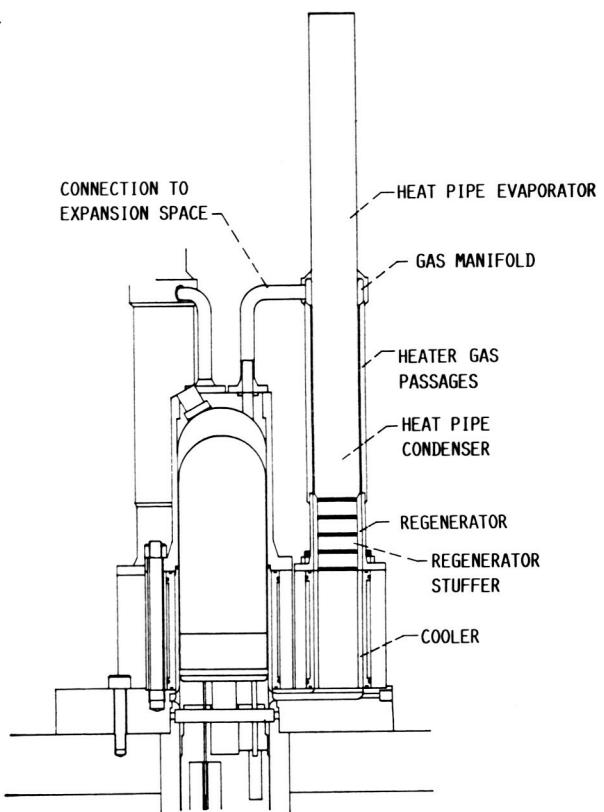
COMPONENT LAYOUT OF A HEAT EXCHANGER MODULE.
